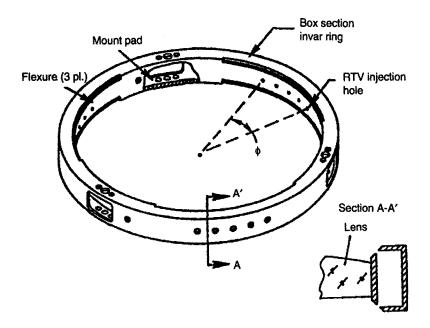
A flexure-type lens mounting in which the lens is bonded to three flexure blades machined into a box-section cell. (Adapted from Steel et al.²⁶)
